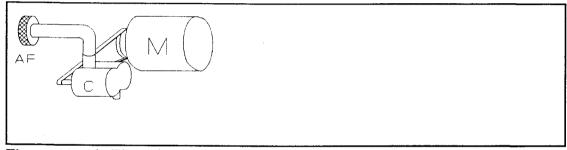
Air Filter (AF), Compressor (C), and Motor (M)
